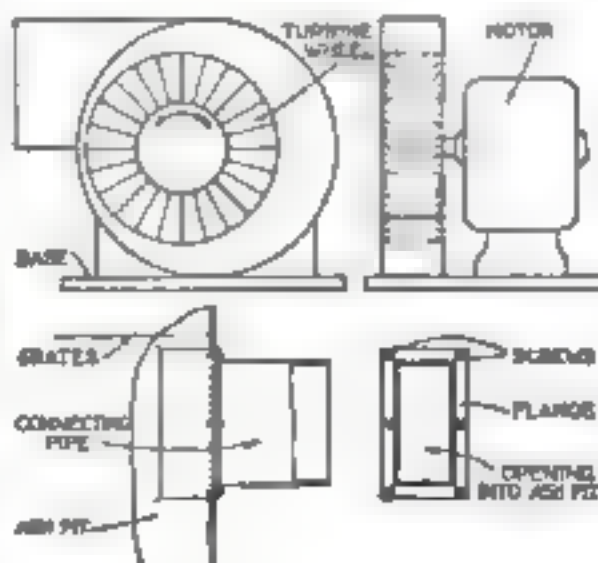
How to install a turbine wheel in a homemade casing. In the side view above, the cover has been removed to show the location of the wheel, which is placed as closely as possible to the edge of the discharge opening. This should be the same as or greater than the intake opening in area. The intake opening is equal to the internal diameter of the wheel and, of course, centered on the wheel.
